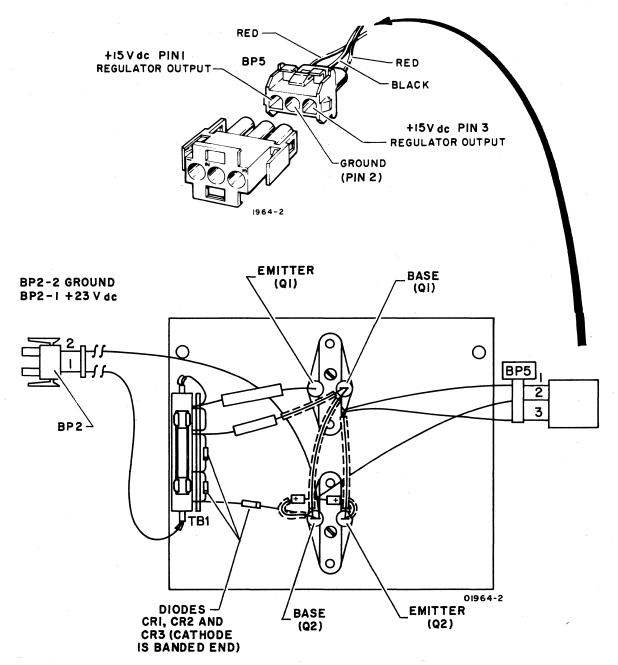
+15-V dc Regulator Assembly Detail (Rear View)
